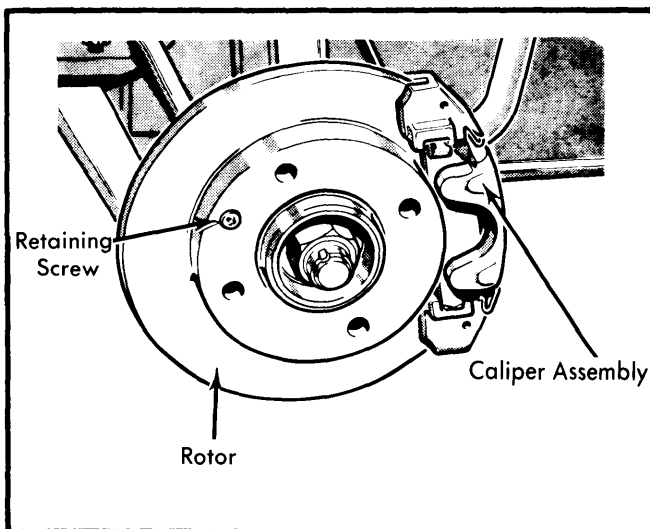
Fiesta Disc Brake Rotor & Caliper Front Wheels Only
